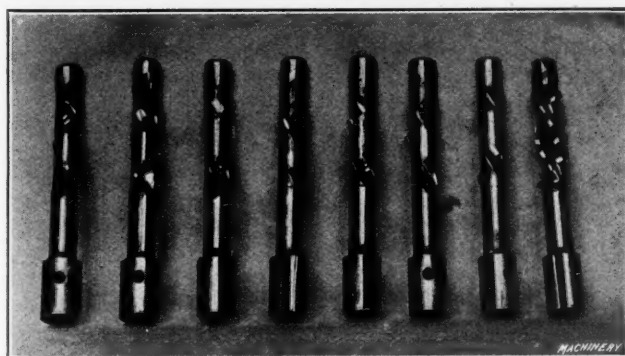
Set of Eight Taps used in Fixture shown in Fig. 1
